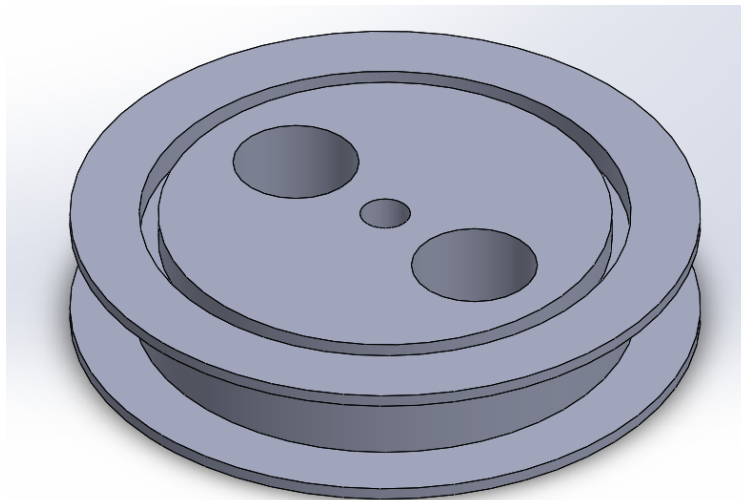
Gear part. The lateral face would have guides for a toothed belt.
